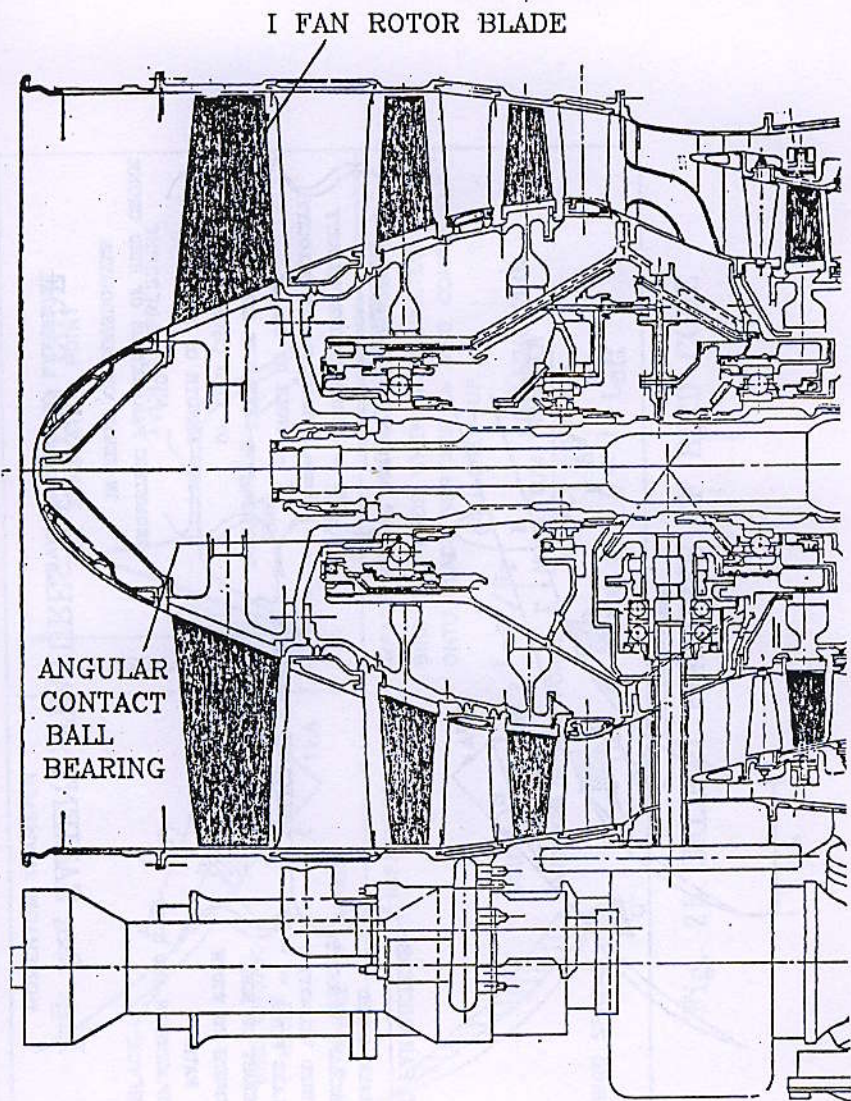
TYPICAL OVERHUNG FAN ROTOR WITH A FRONT THRUST BEARING
